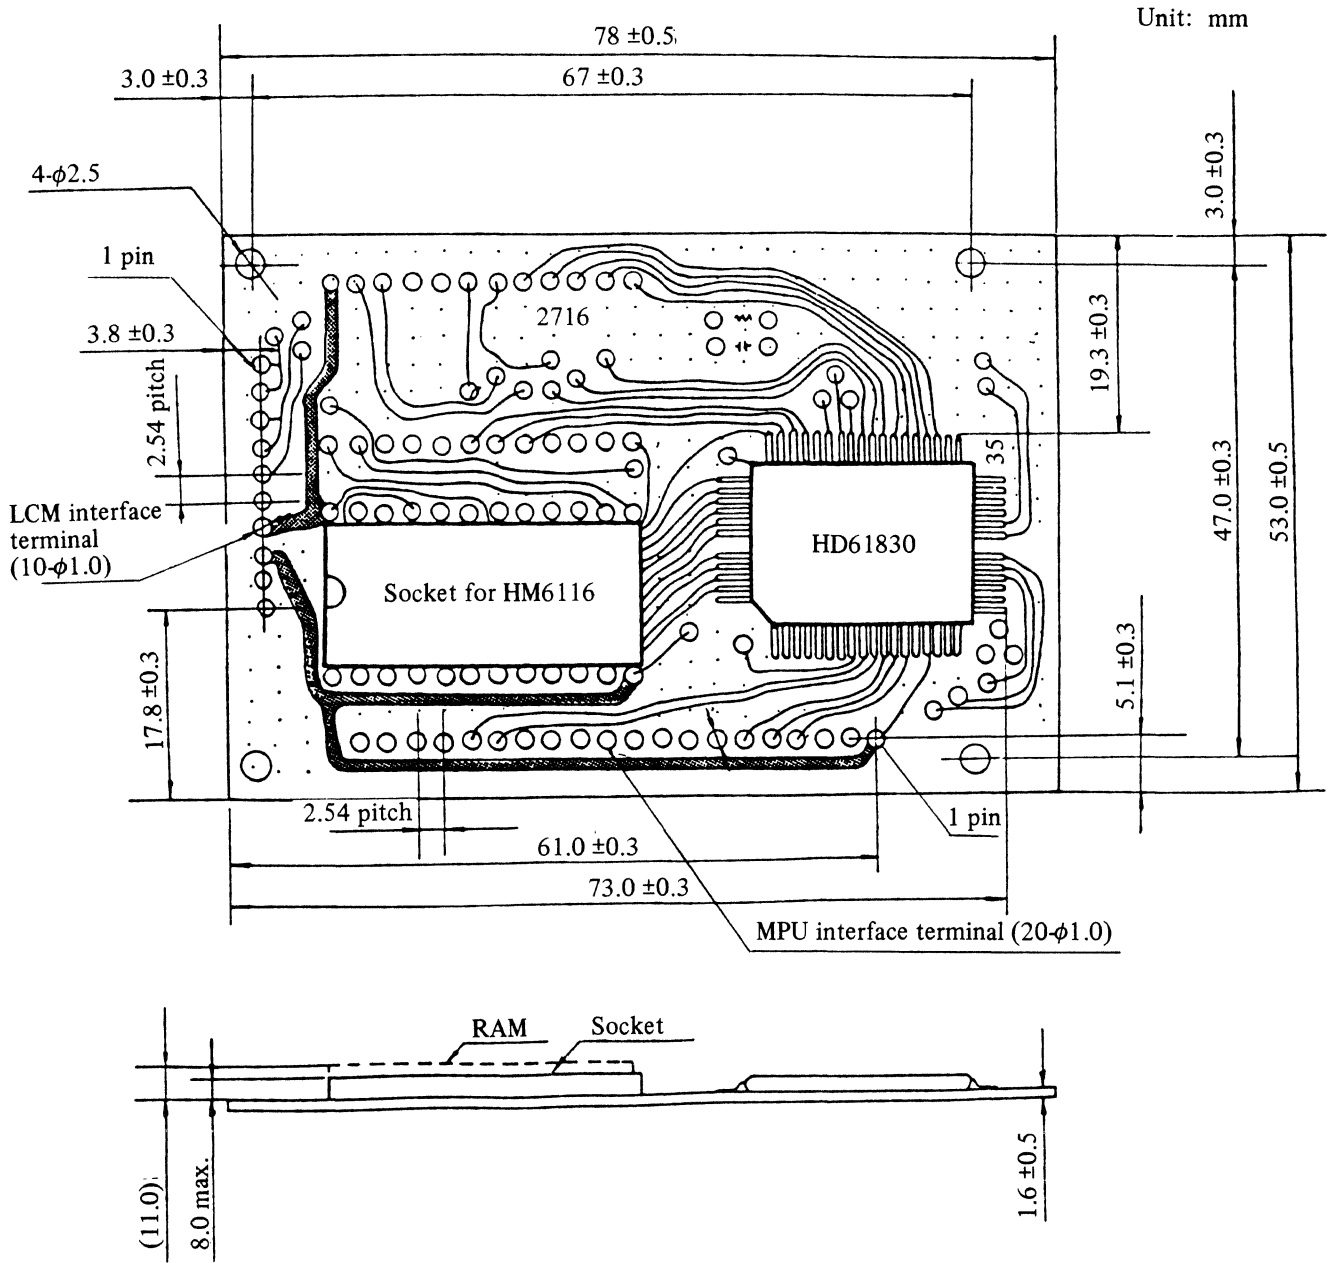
DIMENSIONAL OUTLINE OF CB1020R
